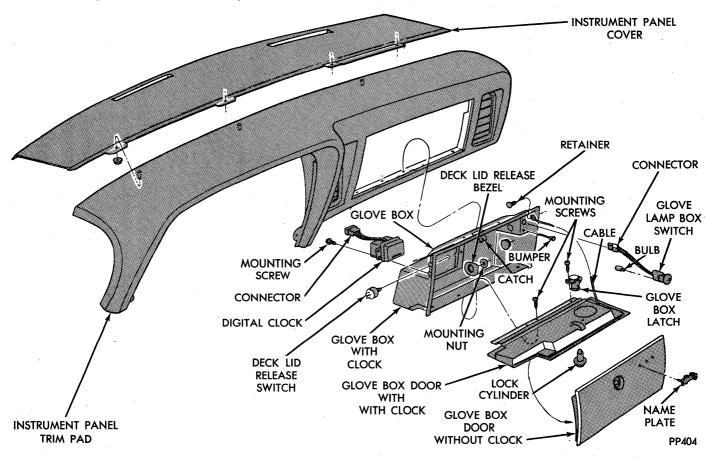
Instrument Panel Cowl Top, Trim Pad and Glove Box Assembly F and G Models
